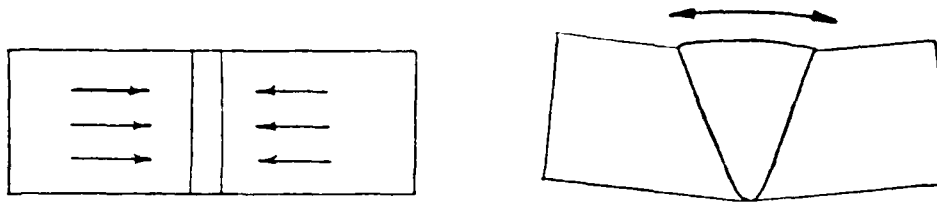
EB WELD SHRINKAGE VS. CONVENTIONAL ARC WELDING SHRINKAGE
